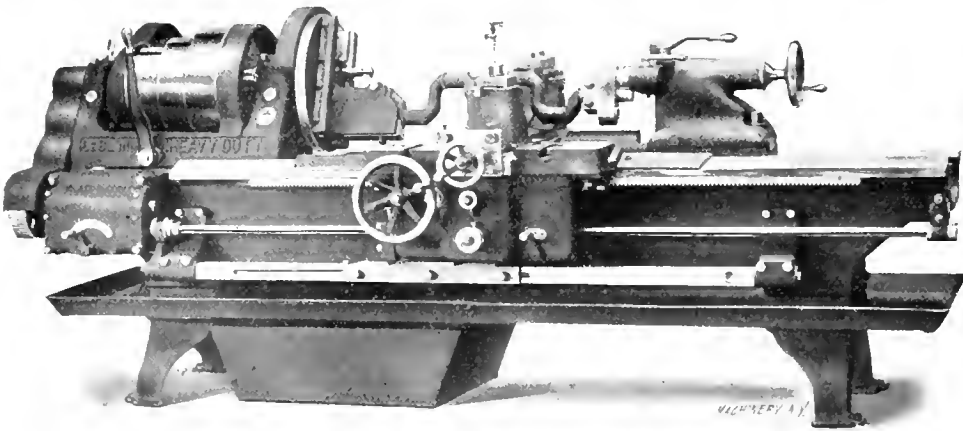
Le Blond Heavy-duty Lathe arranged for Crank-shaft Work
